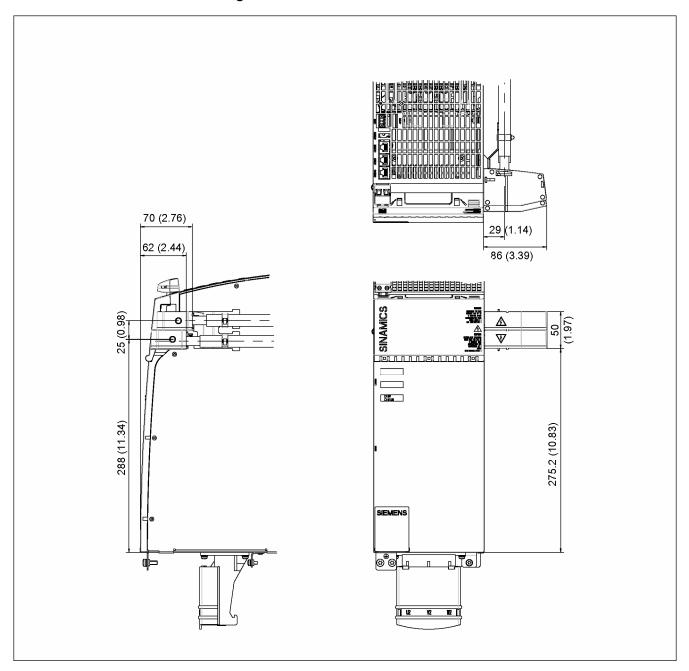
Dimension drawing of 150 mm component with DC link rectifier adapter for 35 mm² to 95 mm², all dimensions in mm and (inches)
